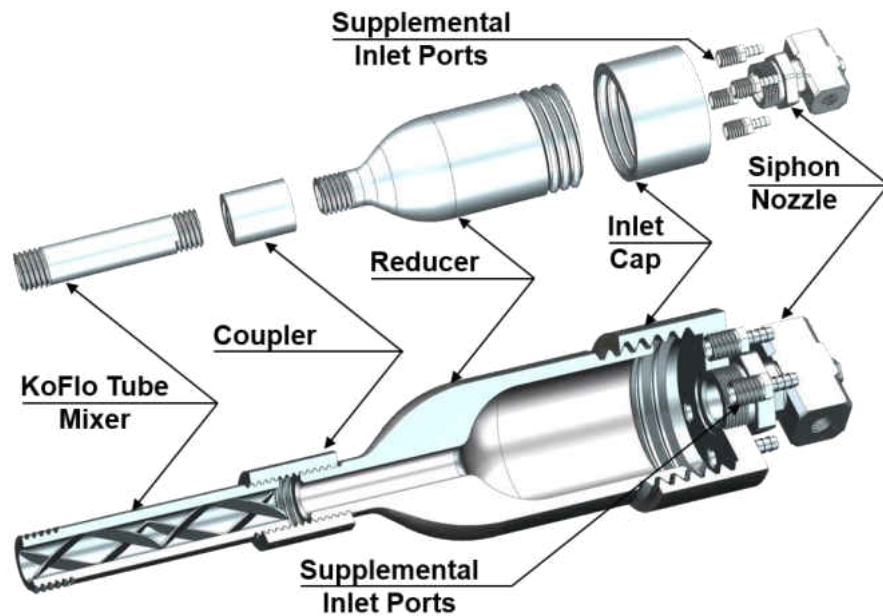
Assembly model and cross sectional view of fuel delivery nozzle.
